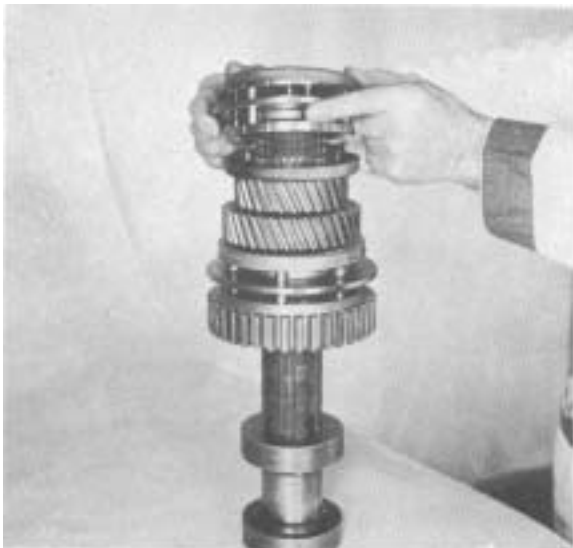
Install 4th & 5th synchronizer on shift hub sleeve.
